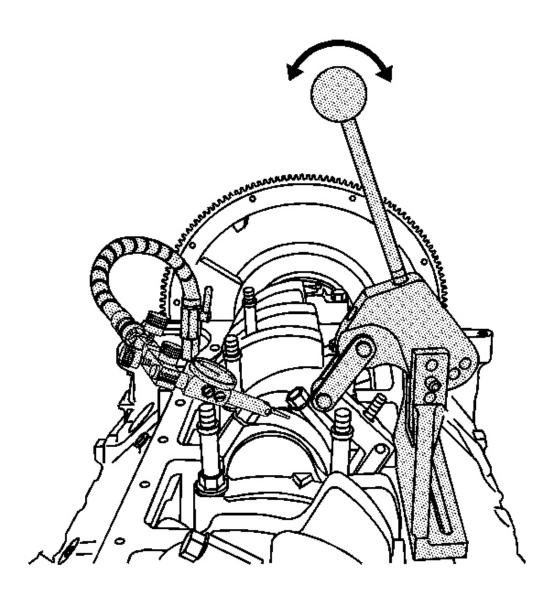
Actuating Pivot Arm Assembly Handle Courtesy of GENERAL MOTORS CORP.
